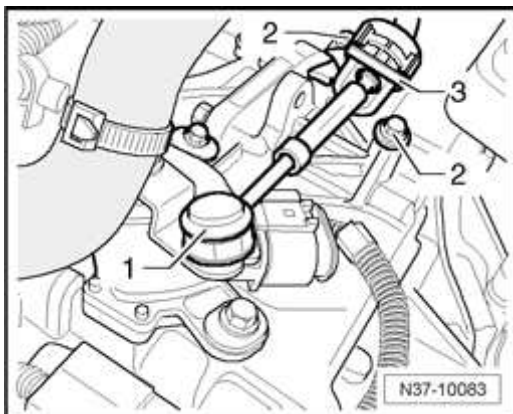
Identifying Selector Lever Cable Lock And Selector Lever Cable
